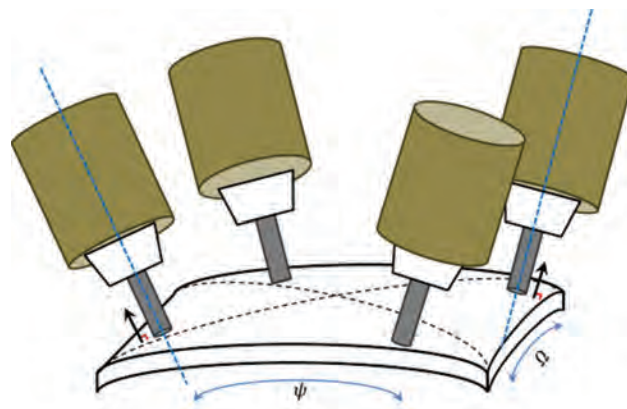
Schematic representation of adaptive CNC five-axis machining tool head to follow the evolving shape and thickness during mechanical backside thinning
